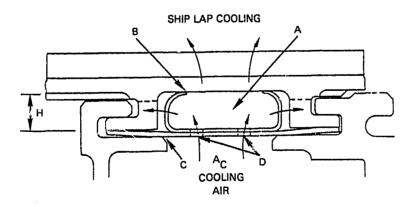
Ceramic Seal Cooling Design Utilizes a Cooling Air Annulus Between the Attachment Rails of the Segment
